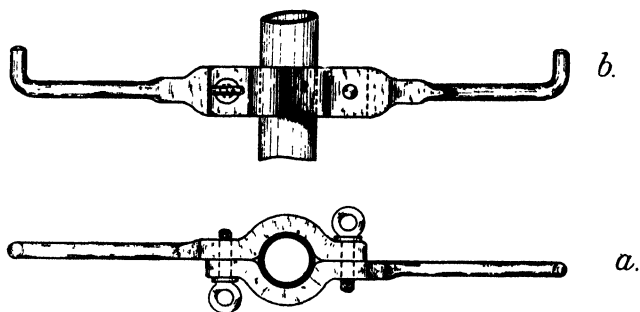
Pipe Tiller: (a) Plan; (b) Elevation.
